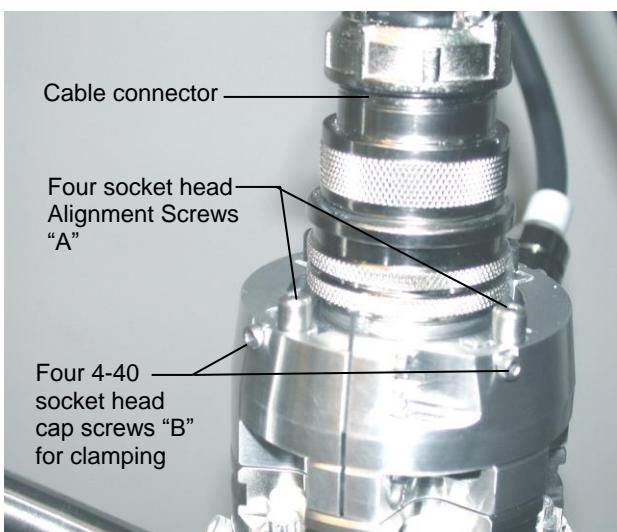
Adjustable Feedthrough Assembly with Alignment Screws
